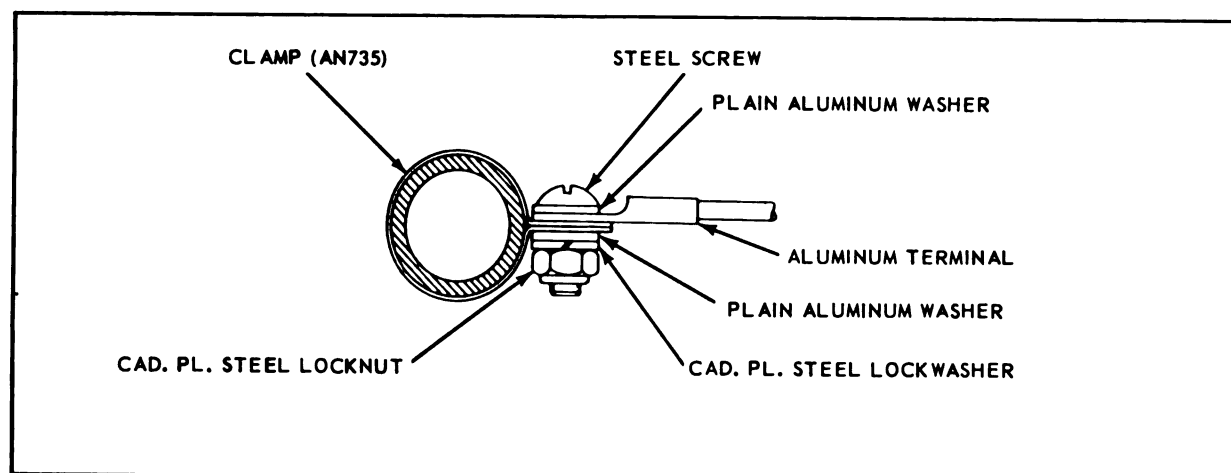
Aluminum Jumper Connection to Tubular Structure
